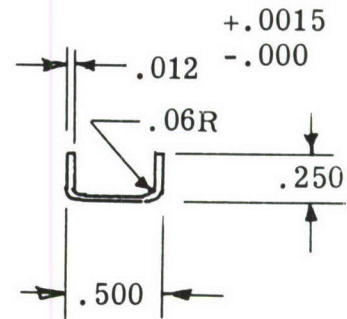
ASSEMBLY "LAP" 1 EA REQ.
